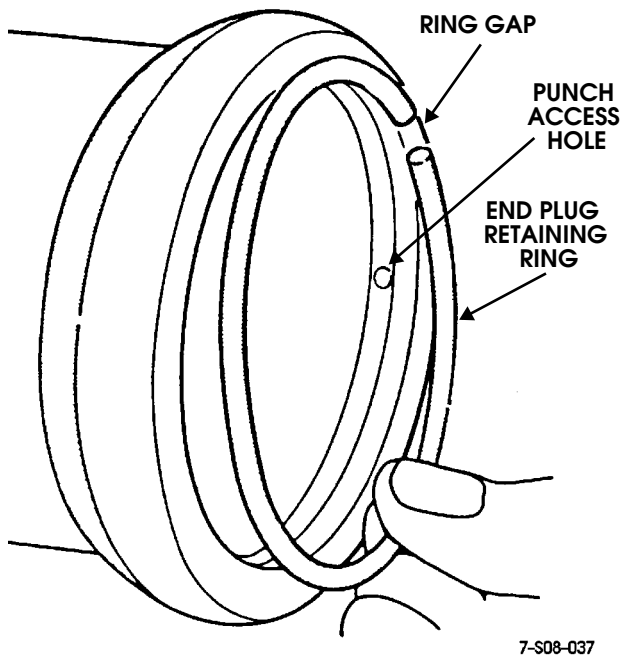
Positioning End Plug Retaining Ring in Housing
